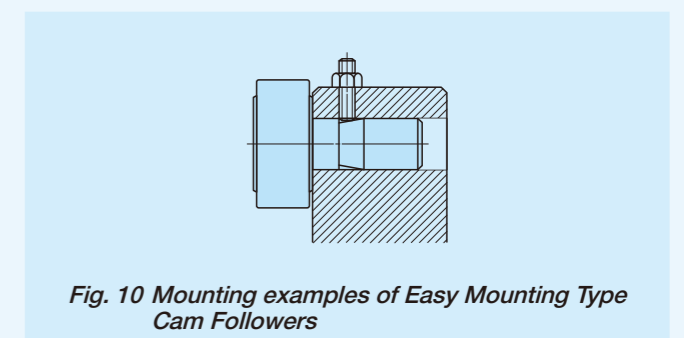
Mounting examples of Easy Mounting Type Cam Followers
